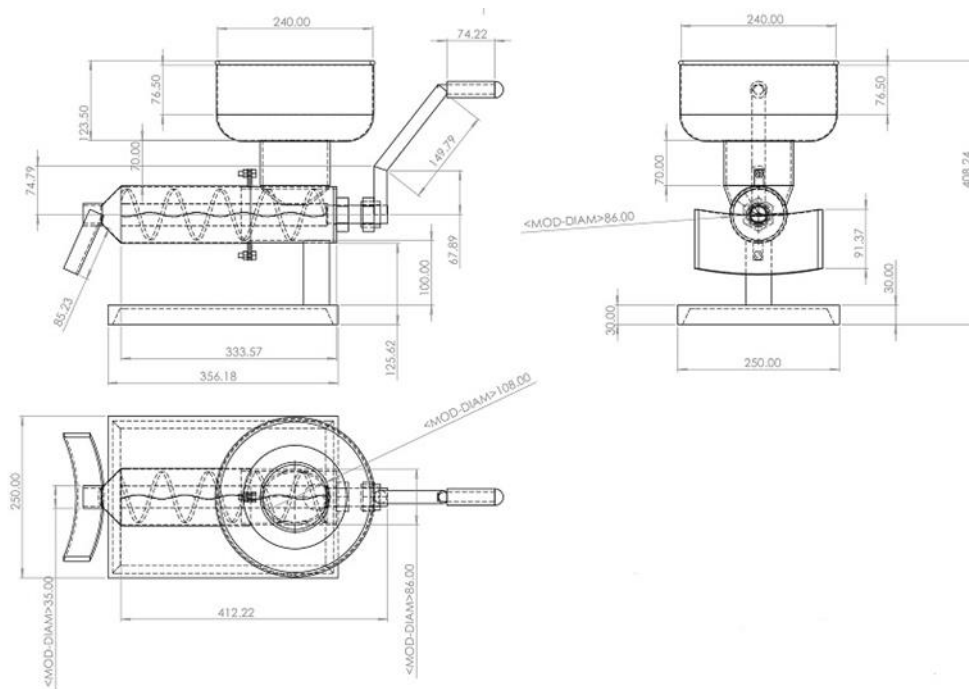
Autographic projection of the screw juicer (All dimensions are in mm).
